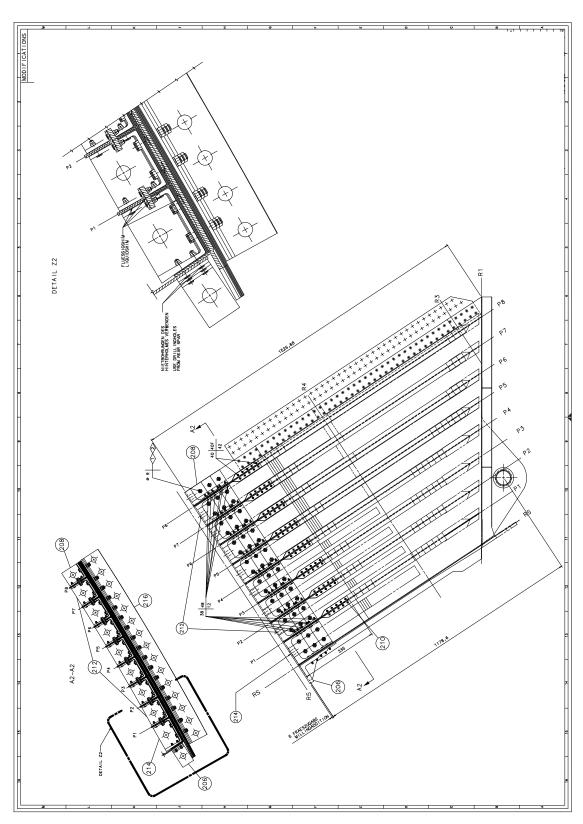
LHS Lug Test#2 specimen drawing [inside view]
